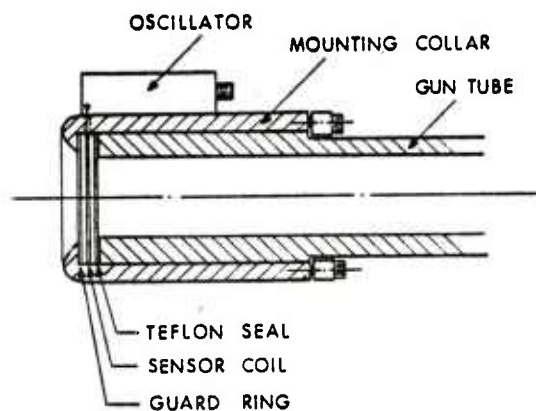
Cross-Sectional View of Sensor Coil Assembly Rigidly Attached to the Muzzle
